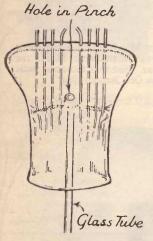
A close-up of a valve pinch showing the glass tube through which the air is withdrawn.
